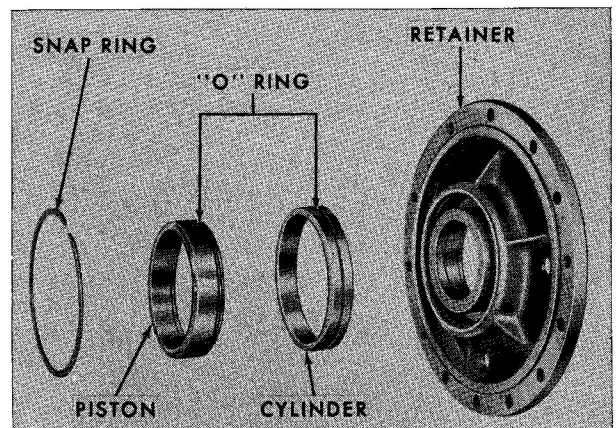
Differential bearing retainer with brake piston and cylinder removed; early production unit is shown. Cylinder is not removable on late production models.
